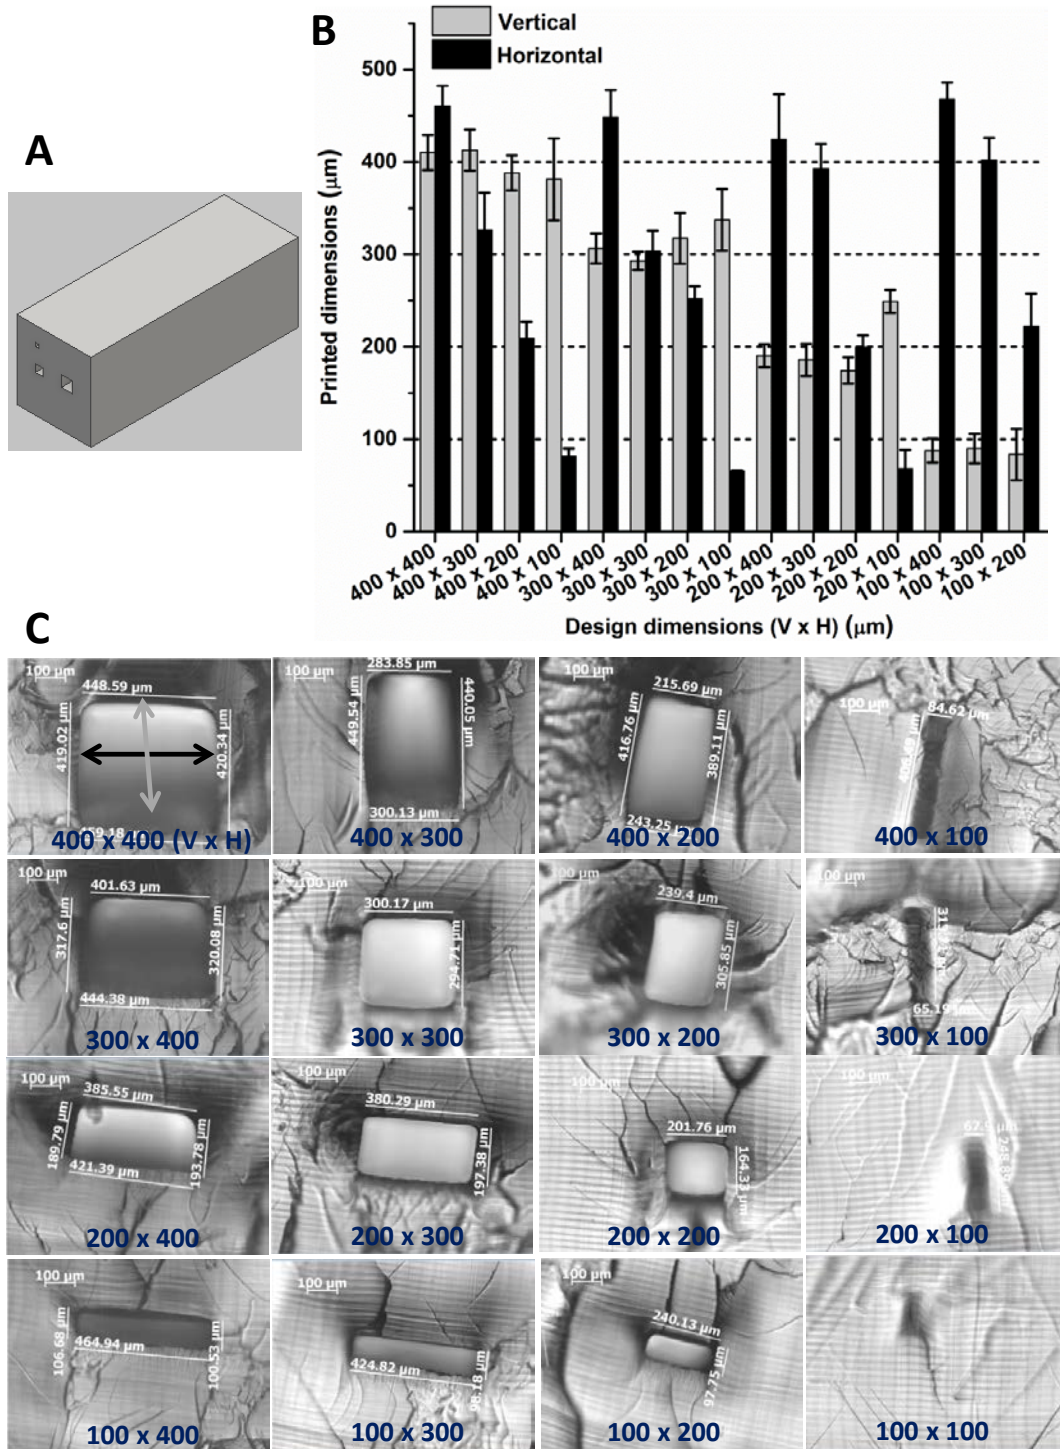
A) A representative 3D design of a block with microchannels of desired dimensions. B) Measured printed channel dimensions versus design dimensions (error bars show the standard
